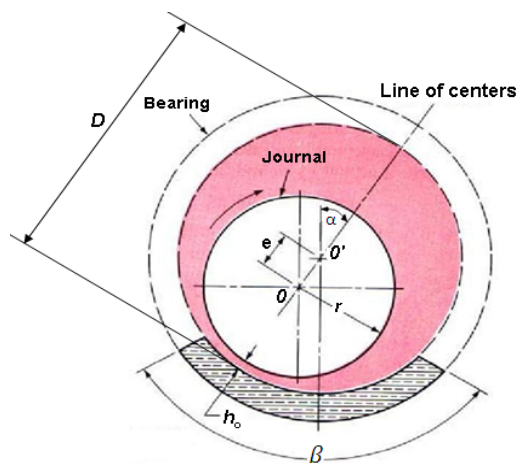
The basic geometrical correlations in the radial bearing: D - diameter of the bearing, $d = 2 \cdot r$ - diameter of the journal, r - radius of the journal, c - radial clearance, e - absolute eccentricity, h_0 - the minimum oil film thickness, [HBT]
